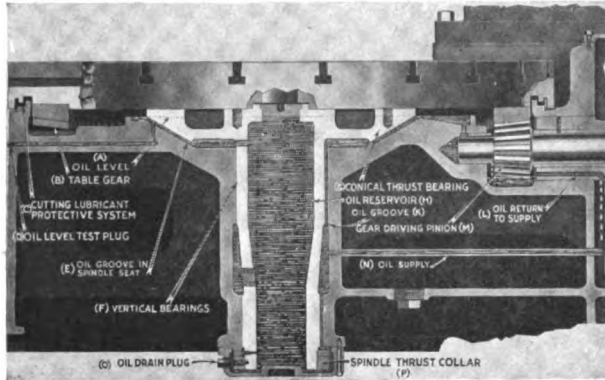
Sectional View, Showing table spindle, table drive and lubrication system
